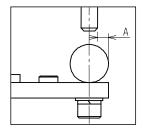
Rail Guide Shaft and Side Beam
